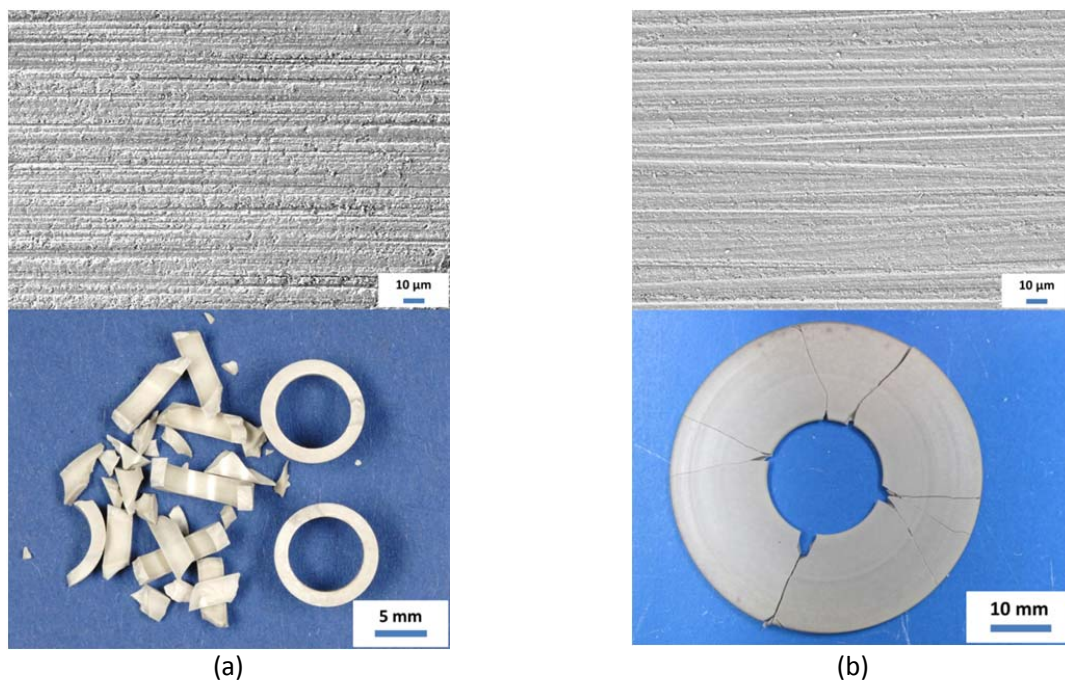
Surface morphology and fracture pattern of (a) helical springs and (b) disk springs tested in cyclic fatigue at 1000 °C.
